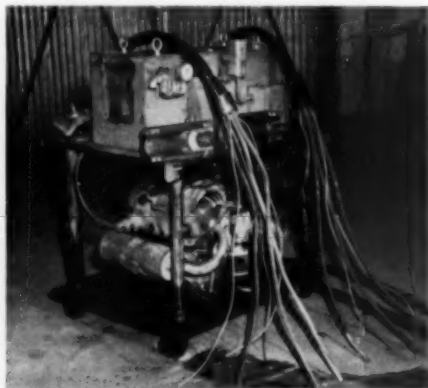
A 5 KW 440-v cable vulcanizer. Type G cable at left prepared for pothead with a completed pothead at right. Self-contained power supply mounted beneath.
